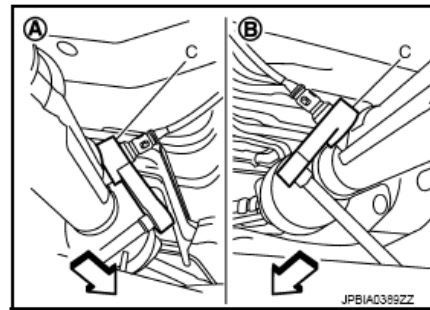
Removing Heated Oxygen Sensor 2 Using Wrench
